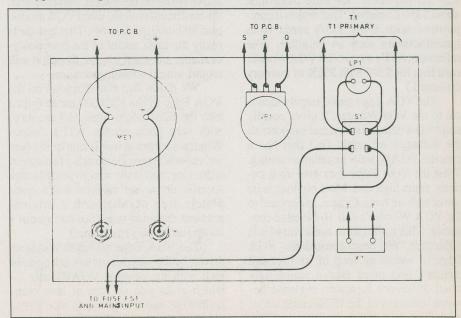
Interwiring to the front panel mounted components. Letters relate to points on the PCB.
